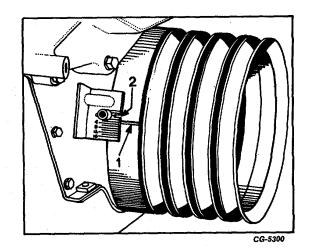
Illustrating Timing Marks on Crankshaft Pulley Hub and Engine Front Cover
